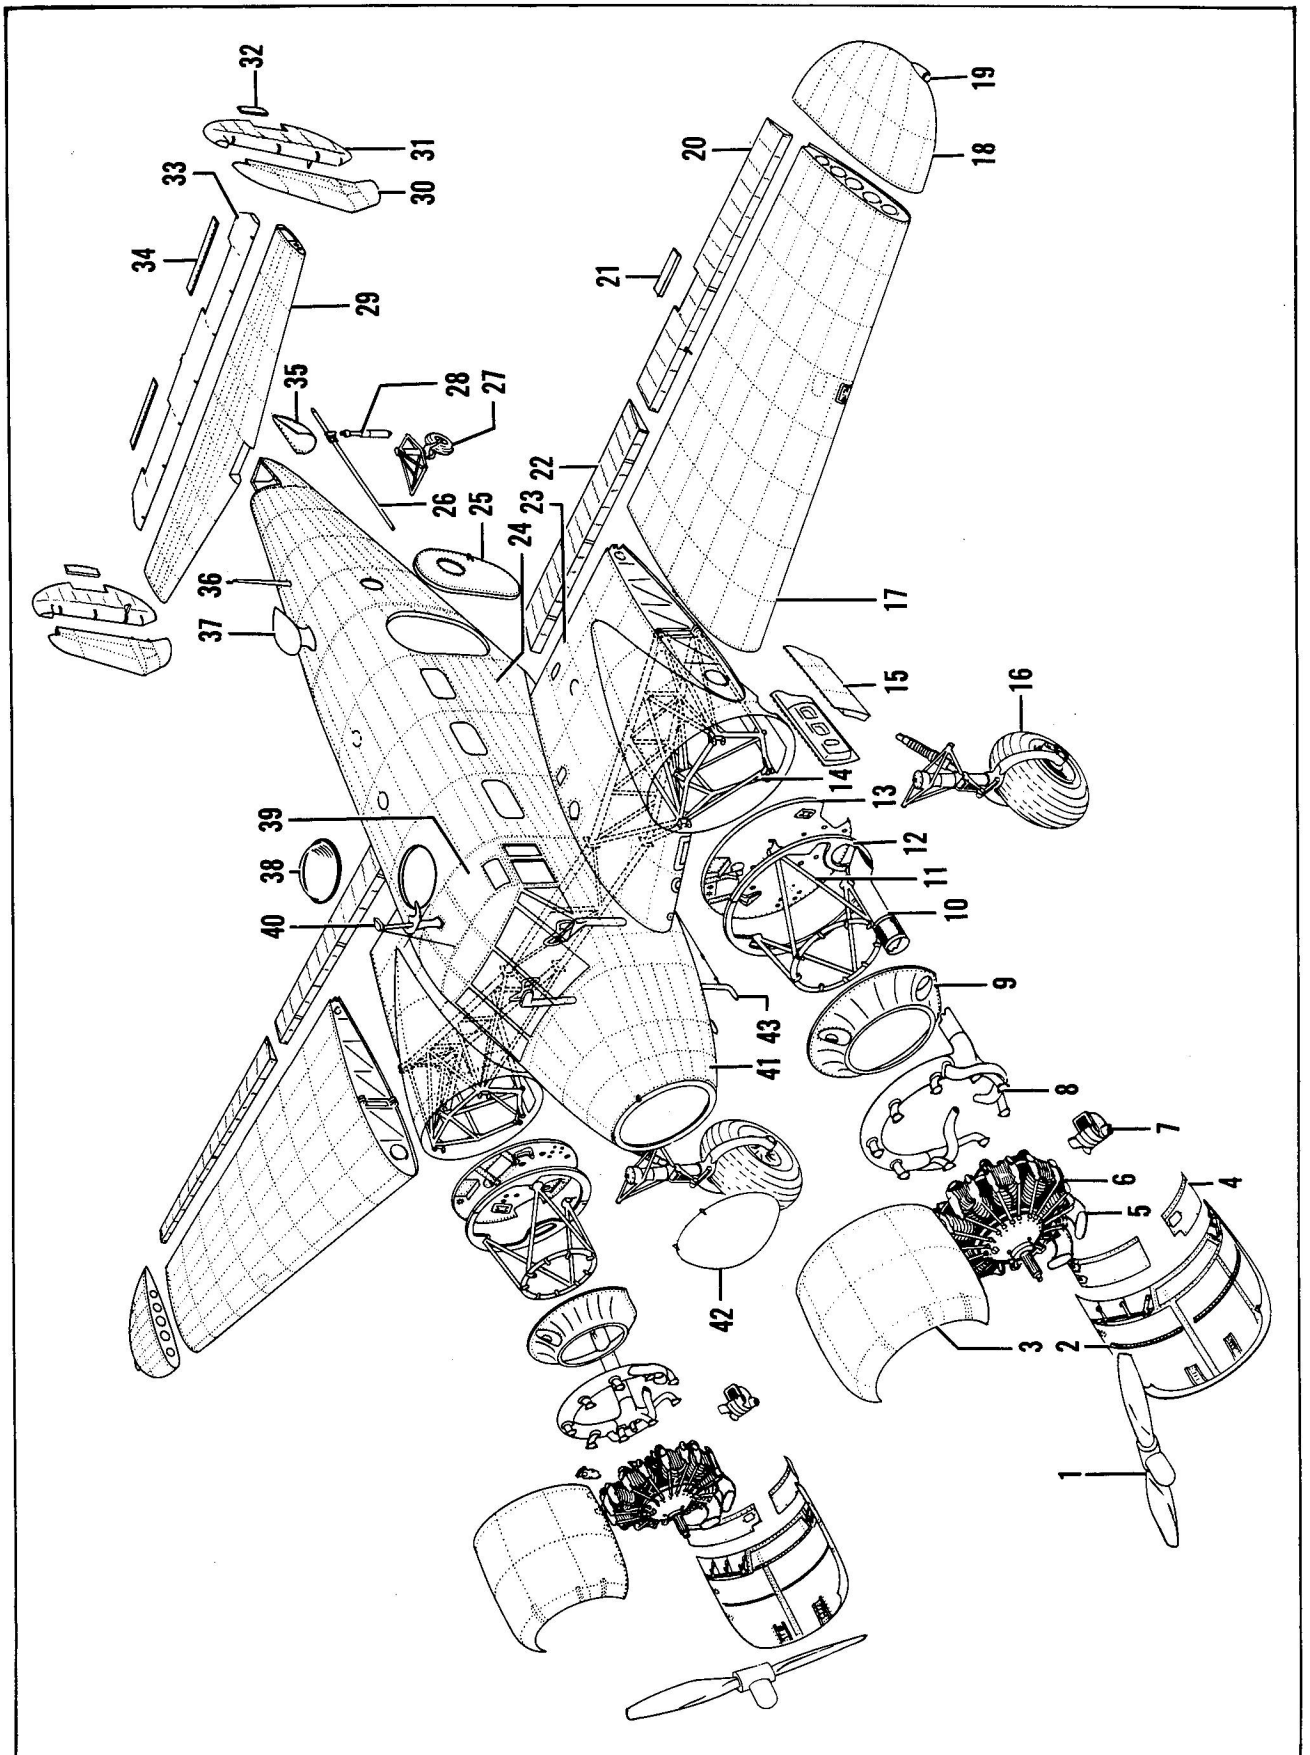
Three-Quarter View Exploded into Major Assemblies
